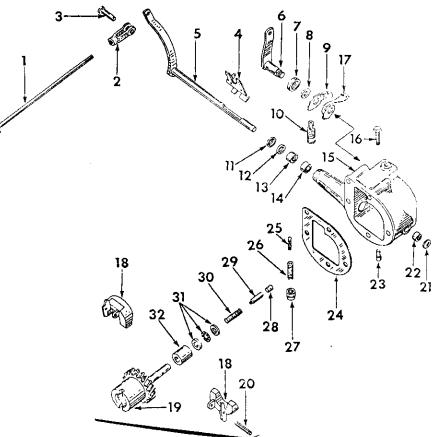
Exploded view of the governor assembly used on Series 424, 444, 2424 and 2444 non-diesel engines.
